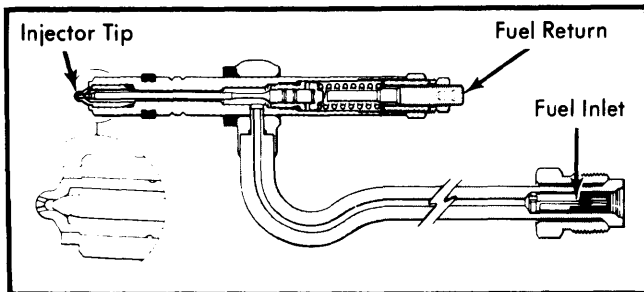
Cutaway View of Rosa-Master Injection Nozzle (Federal Models)
